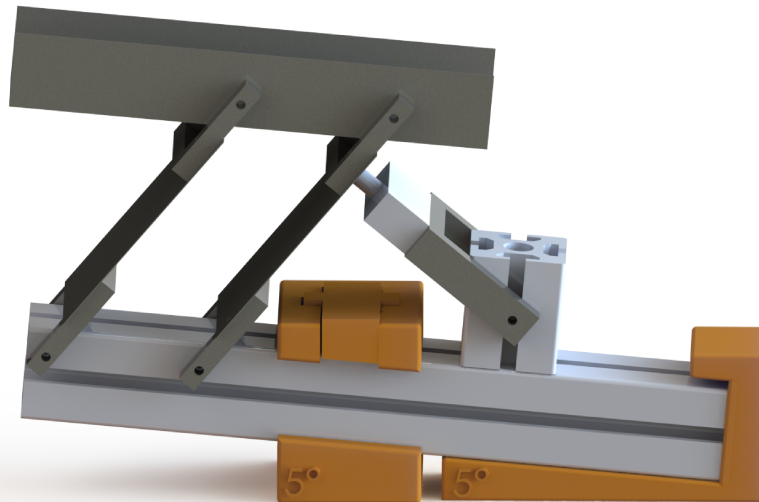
Rendering of the conveyor assembly kept at a 5° angle thanks to the use of a 3D printed support structure (in orange)
